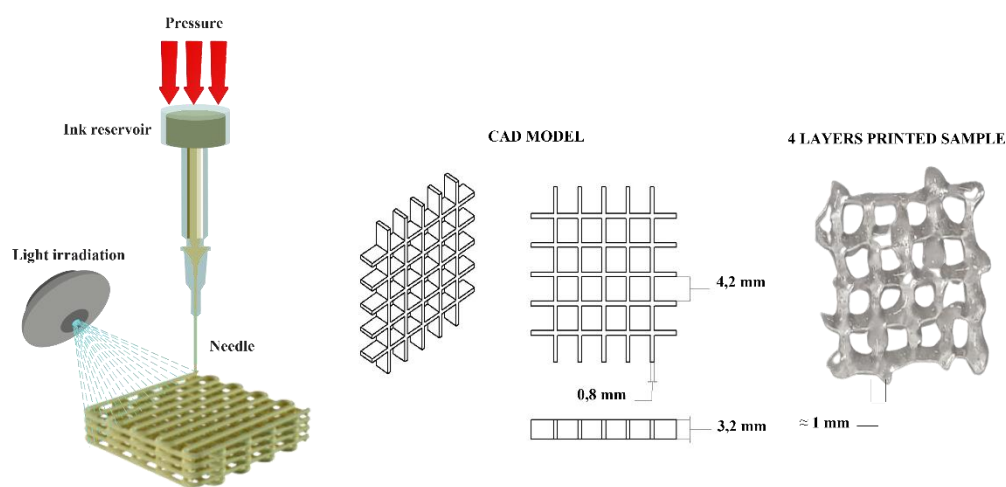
extrusion-based printer scheme, CAD model and the printed 4-layer grid.
